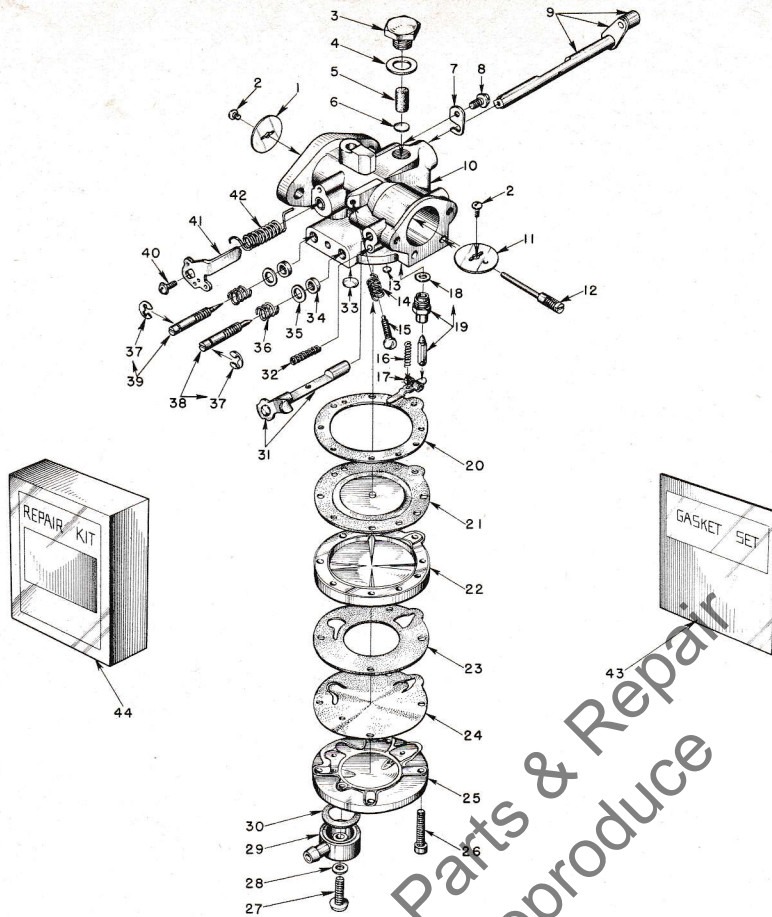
BROWN 1-CP CARBURETOR PARTS
